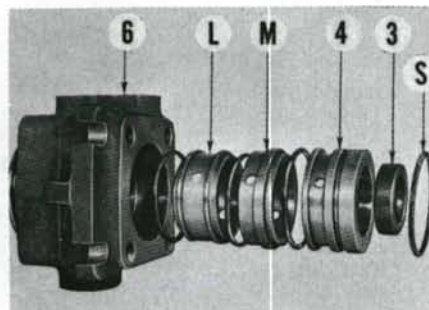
Control valve housing partially disassembled, showing location of bushing sleeves and "O" ring seals.
